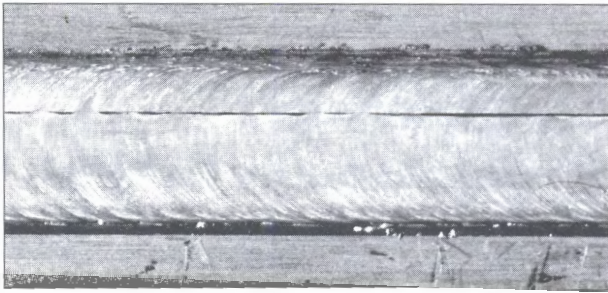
View of the weld face with a defect of lack-of-fusion type made by FSW on aluminium alloy AMg6M 2 mm thick ( $\times 2$ )
